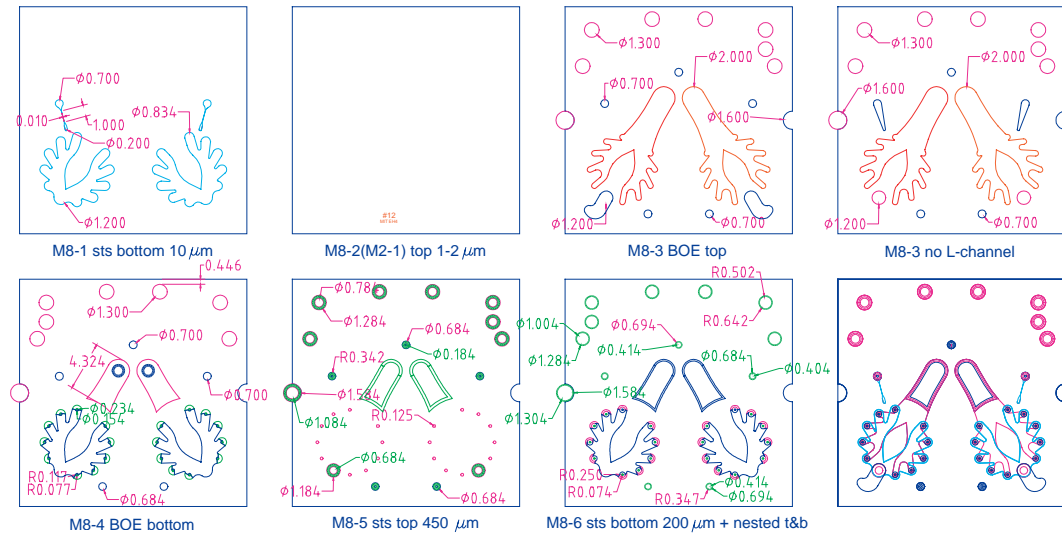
Layer 8 masks. MHT subcomponent device with 10 small valves per valve unit. The only difference is the inlet and outlet hole positions.
